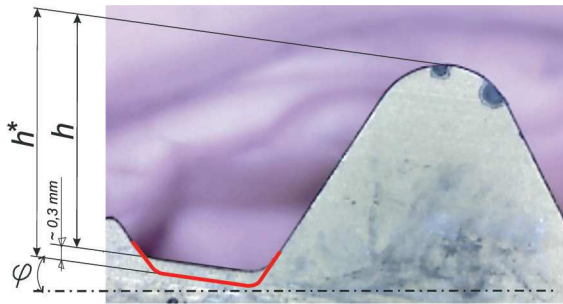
Similar photo to Figure 10, but only with corrected section of cutting edge that forms crest of tool joint's tapered thread
